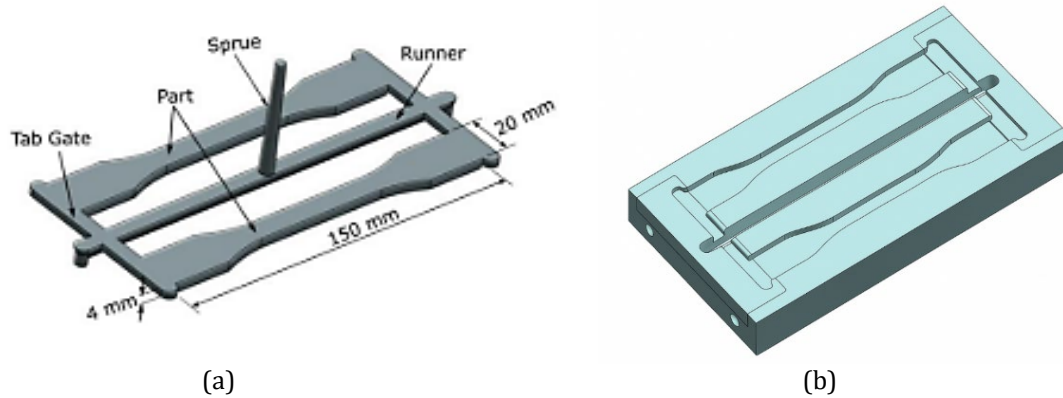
Illustration of the CAD model of the test specimen and the MEC hybrid mold configuration used in this study. (a) CAD model of ISO 3167 thick flat specimen and (b) MEC hybrid mold insert configuration [8].
